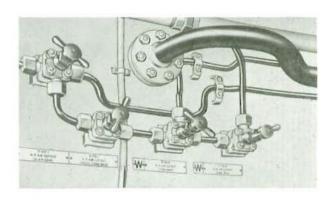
High Pressure Air System, Cutout Valves. Lower Projectile Flat, General Arrangement
